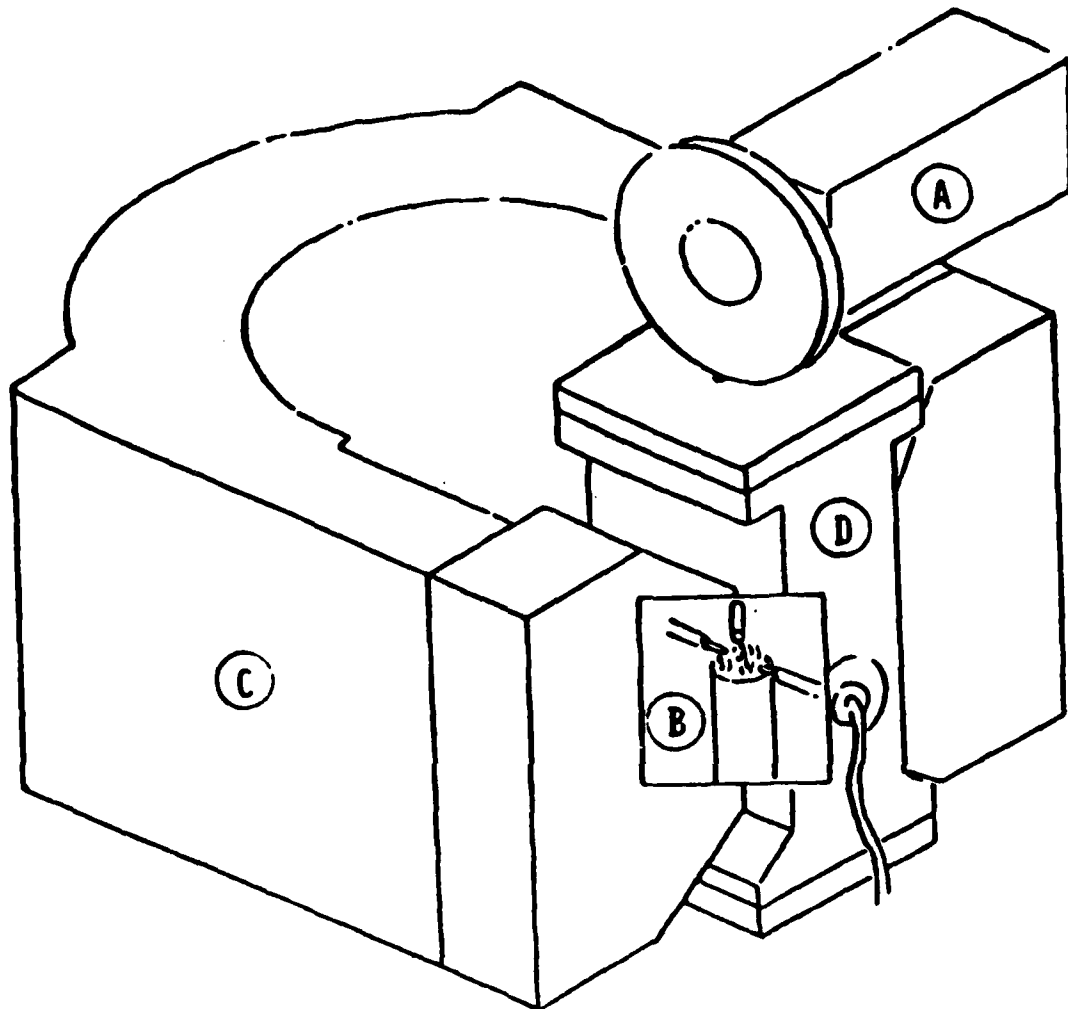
Isometric view of magnetic flowmeter burner assembly showing propellant burning past pressure and velocity measurement station.
